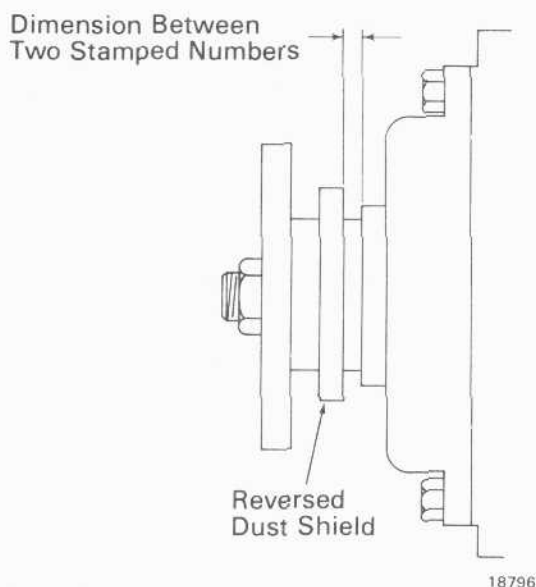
Auxiliary Generator Drive Thrust Measurement (Double Stamped)
